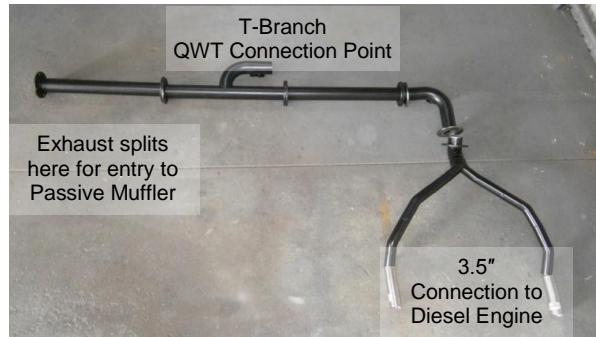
Photograph of the 4.5" (114mm) exhaust system before fitting to the Mercedes Benz diesel engine.
